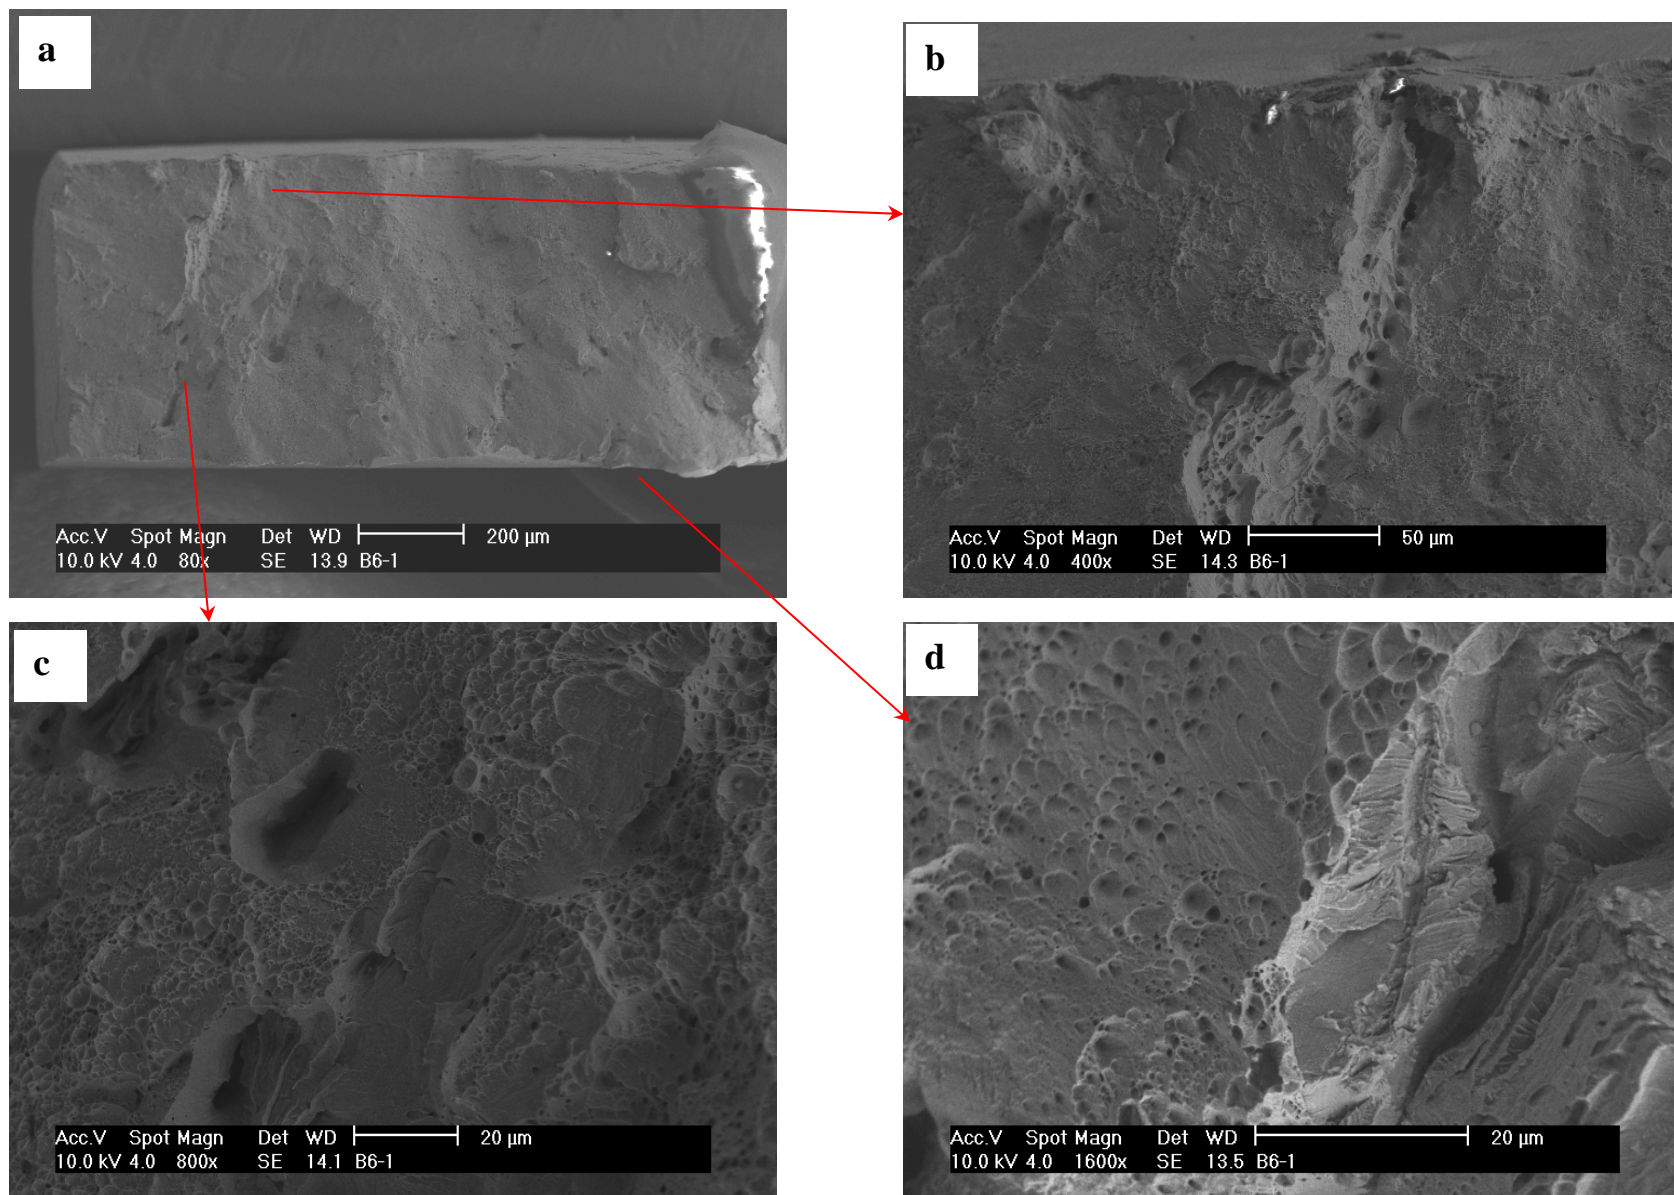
Fracture surface of CW Type 316 SS irradiated to 5.5 dpa and tested in PWR water (specimen B6-1).
